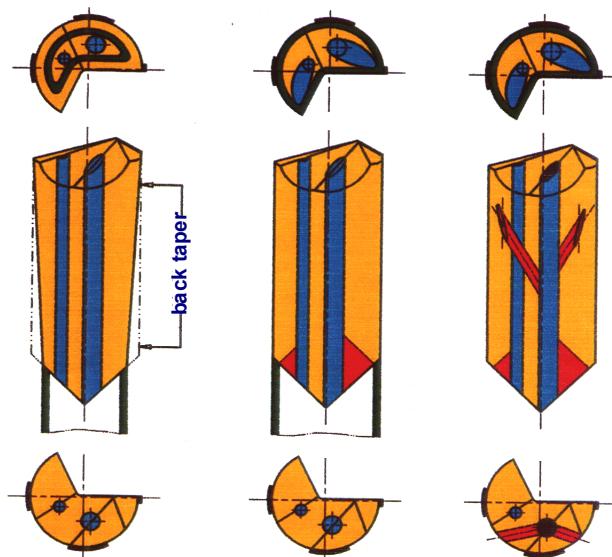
Gun Drilling in Cylinder Head with Minimum Lubrication
